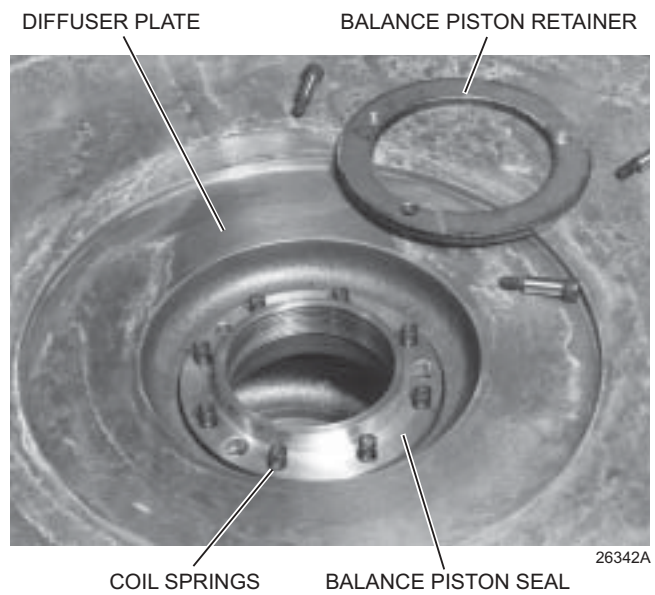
BALANCE PISTON SEAL (DISASSEMBLED)
